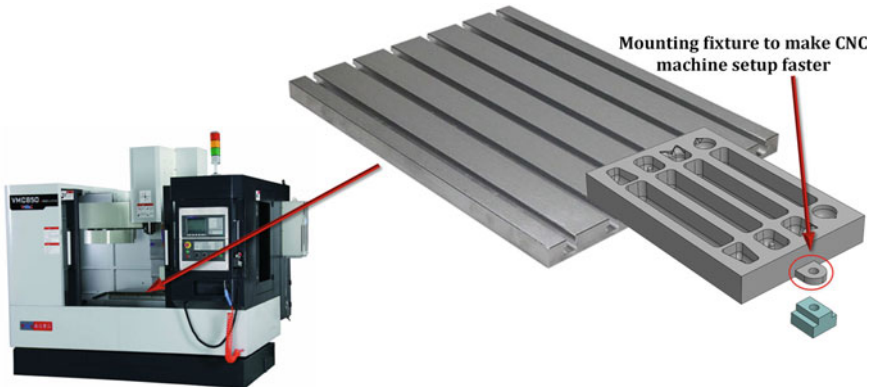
Additional fixtures on AM mould inserts (Courtesy of Olaf Diegel)
